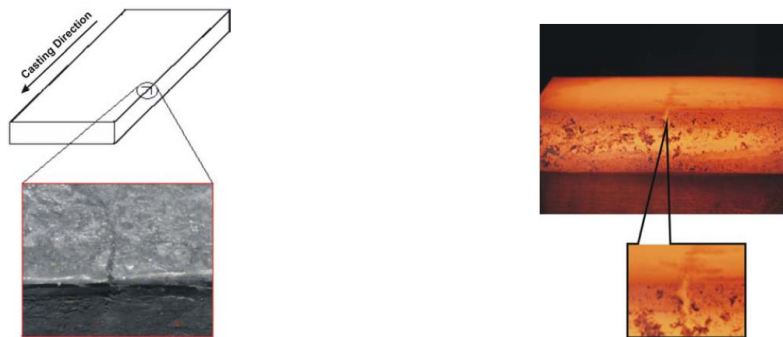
(a) Longitudinal cracks on the surface of a continuously cast slab. (b) cross-section showing a longitudinal crack [11]
